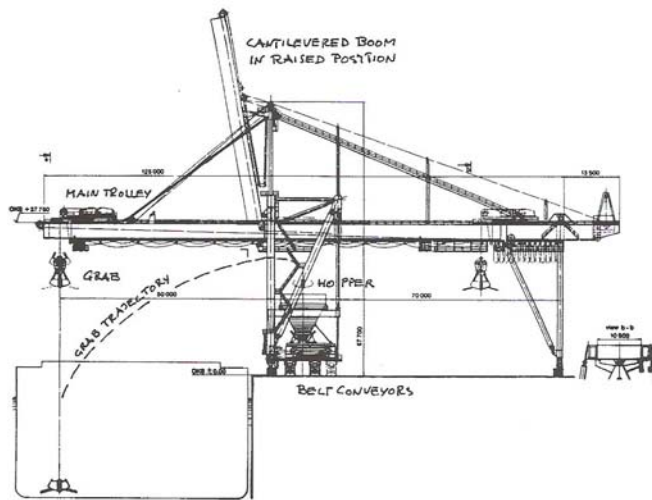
Overhead trolley unloader grabbing crane (Ligteringen, 2009)
